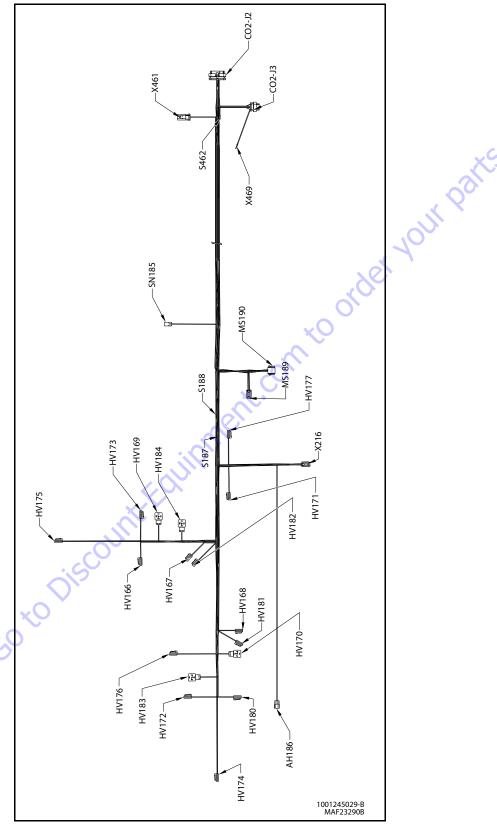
Main Valve Harness - Sheet 2 of 4
